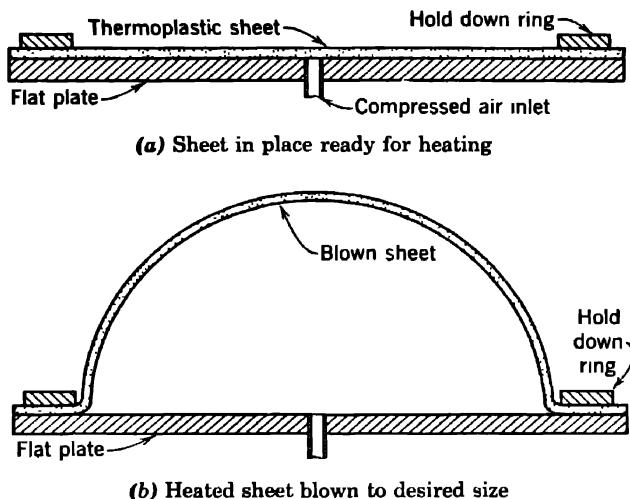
Schematic sketch illustrating indirect blow molding.
